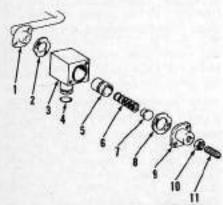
Exploded view of sequence valve. Adjustment screw (11) position should not be changed unless valve pressure is to be reset as outlined in paragraph 306.
